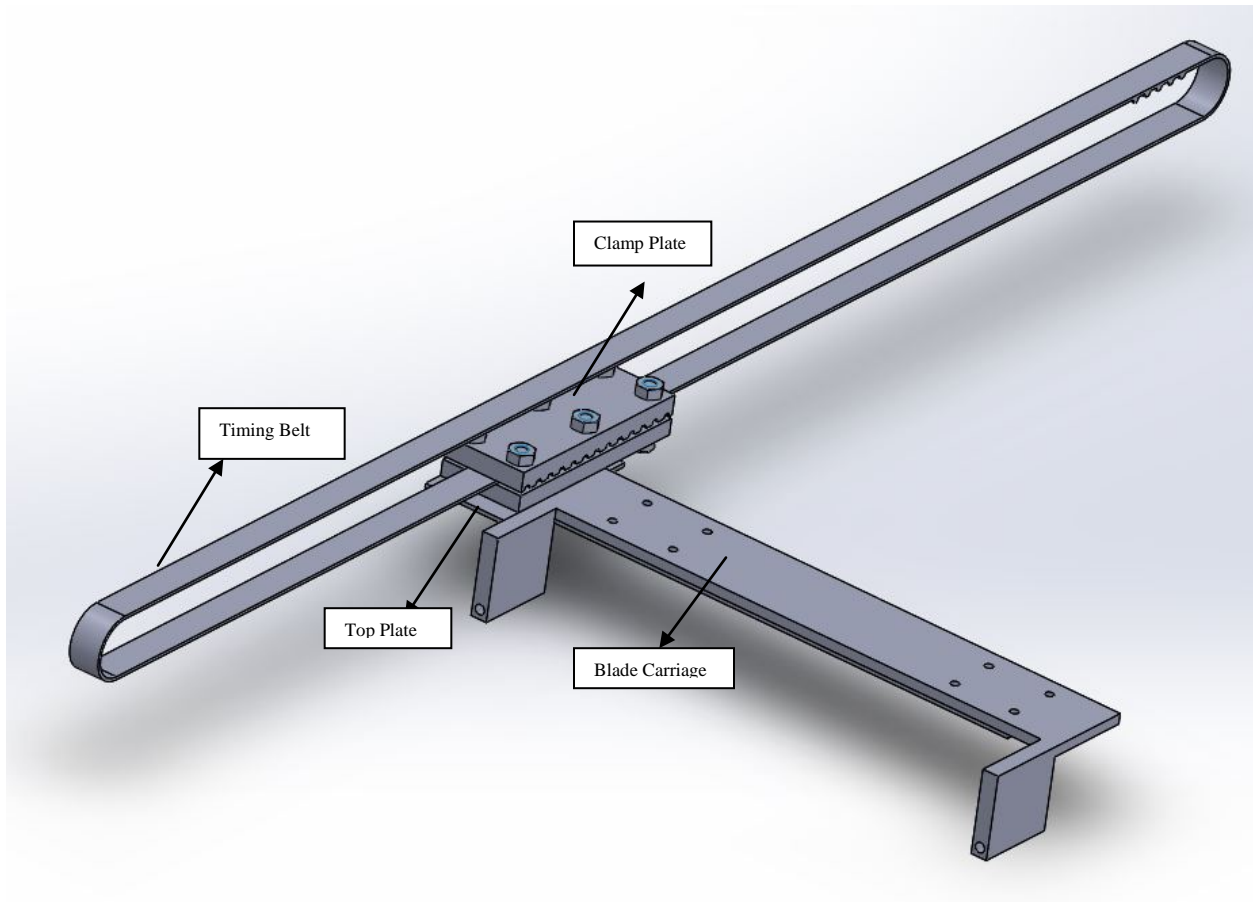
CAD model of Belt-Clamp Plate Sub Assembly
